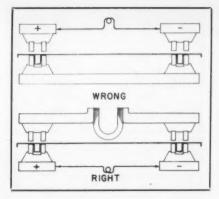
Sketch showing "Wrong" and "Right" methods for series welding two brackets to a panel.
